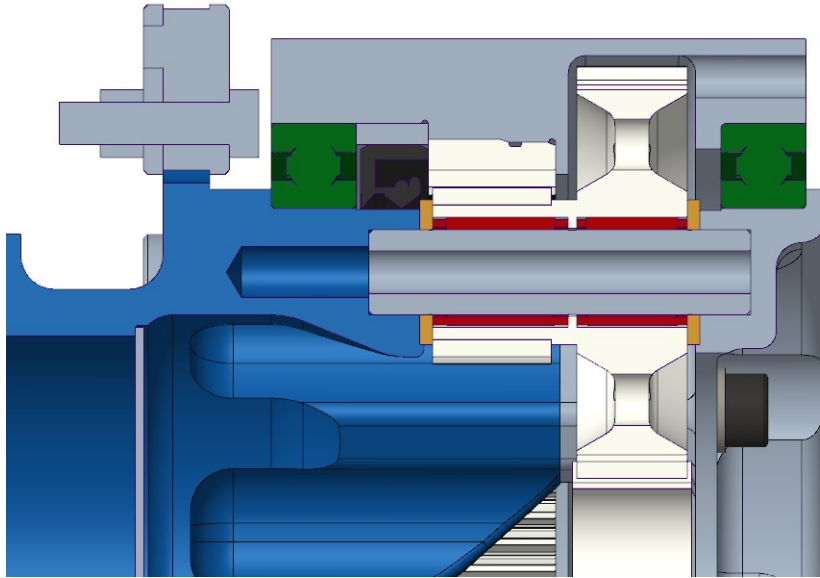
Planet carrier bearings in green, planet shaft needle roller bearings in red and axial thrust washers in orange.
